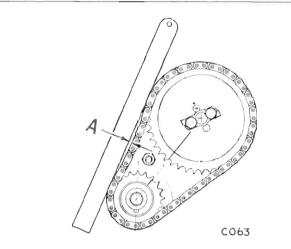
Checking timing chain for wear Dimension "A" should not exceed $0.4^{"}$ (10 mm.)
